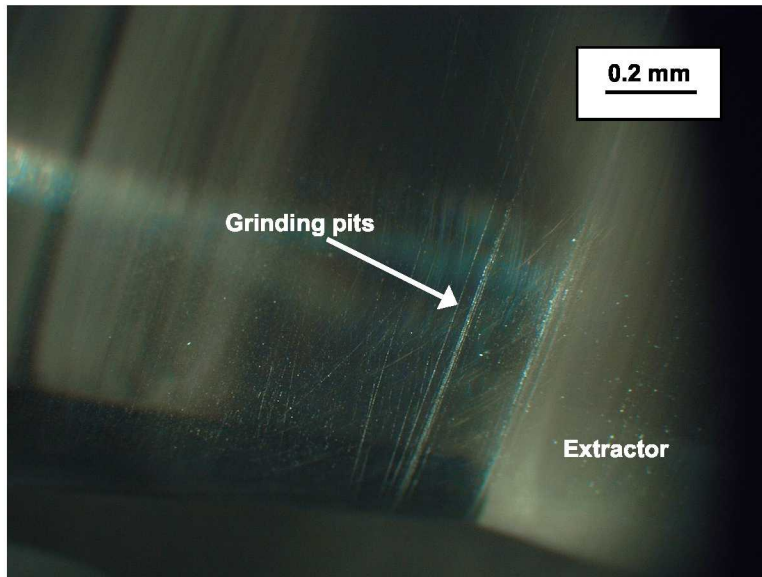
View of lens cone and rod of RSC no. 2 showing surface scratches (grinding damage) prior to testing.
